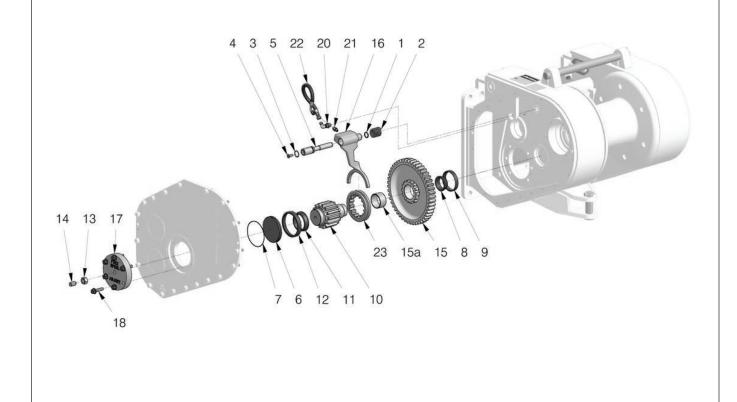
Location of Freespool and Intermediate Shaft Components
